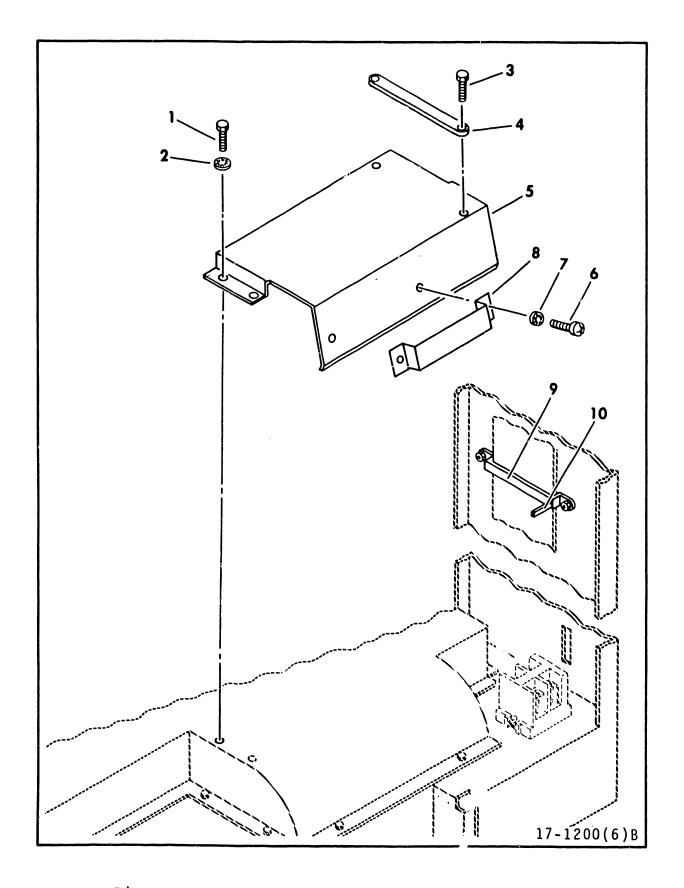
A-12. Frame & Air Assembig (Sheet 6)
